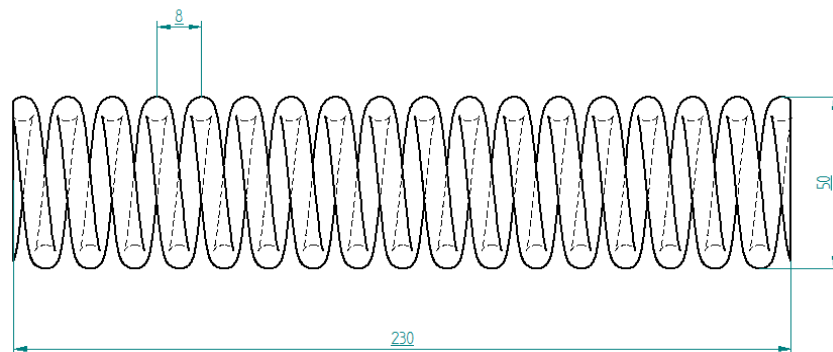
2D Drafting of Helical Spring - Baseline Design
